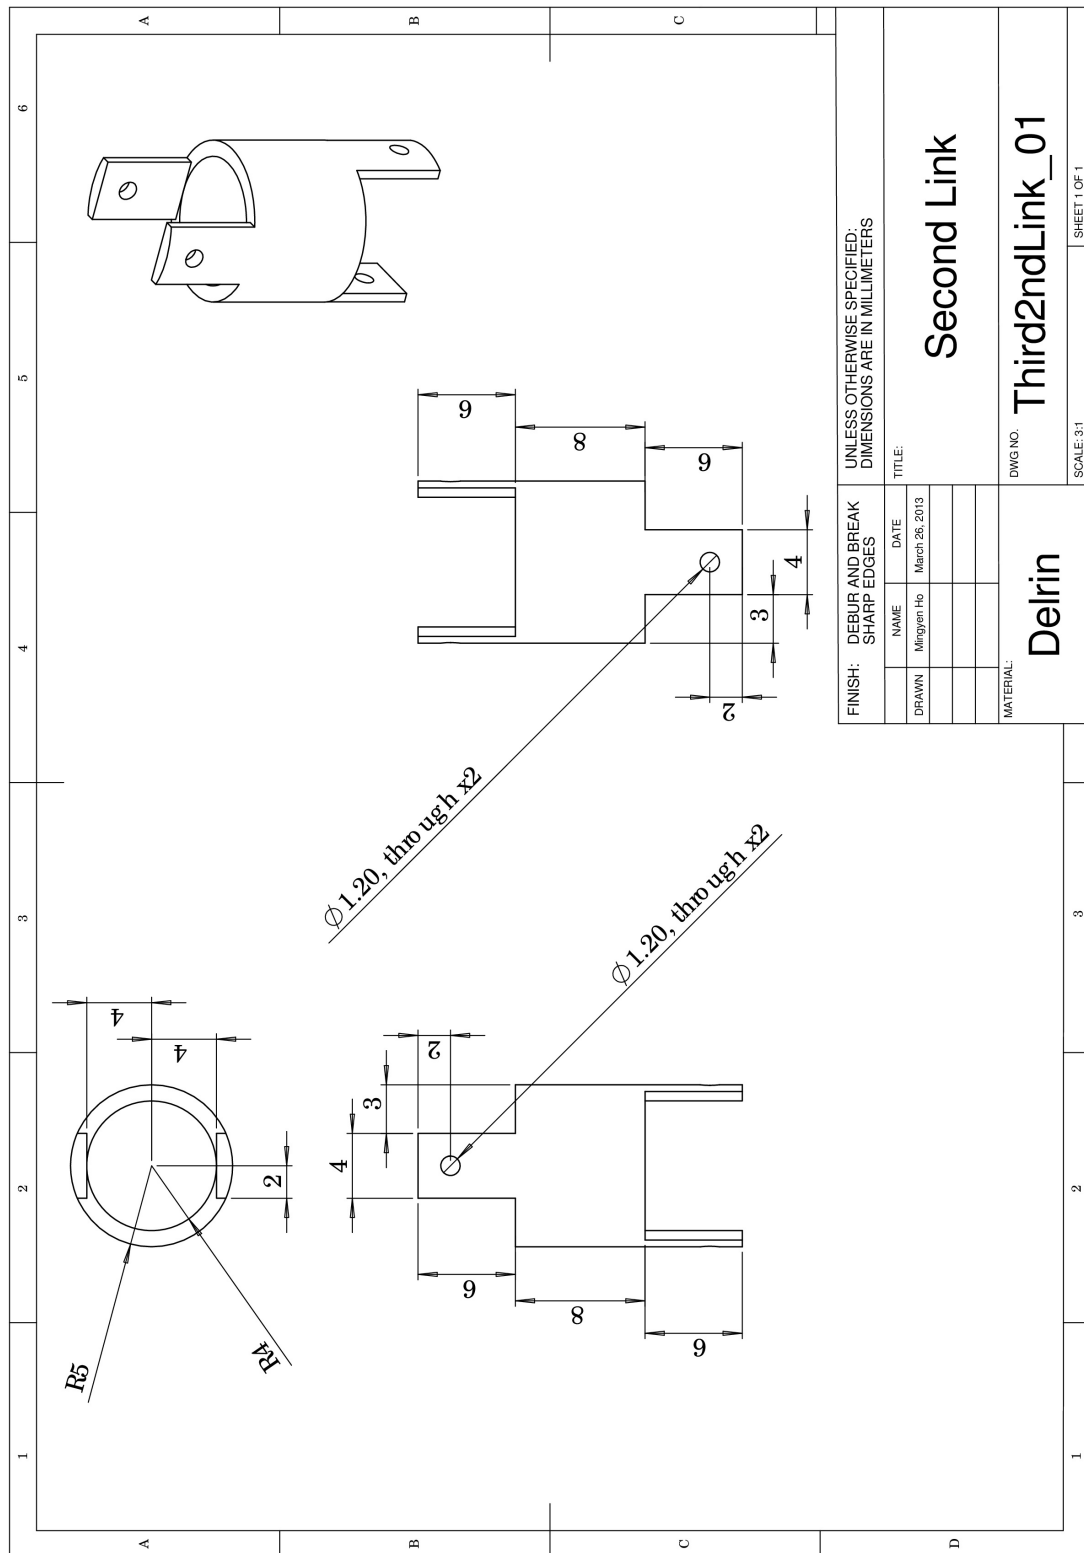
Engineering drawing of the second link of the SMA spring actuated MINIR.
